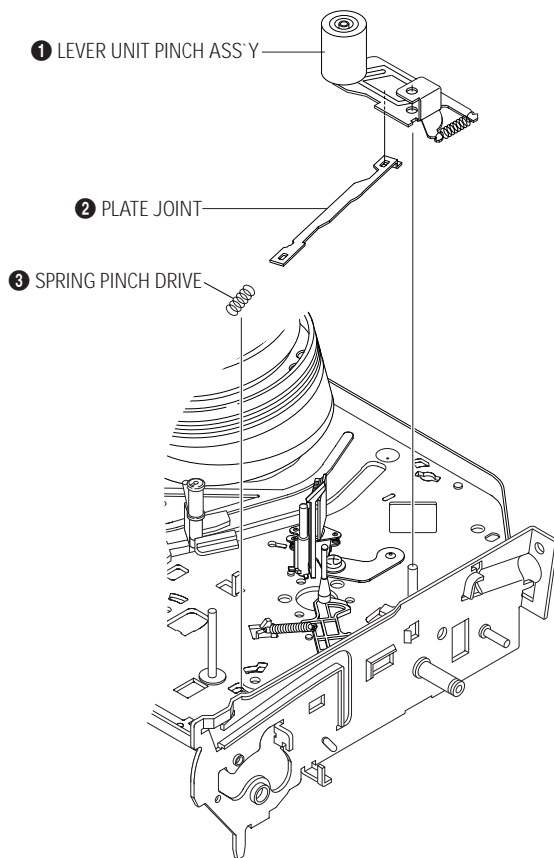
Lever Unit Pinch Ass'y, Plate Joint, Spring Pinch Drive Removal
